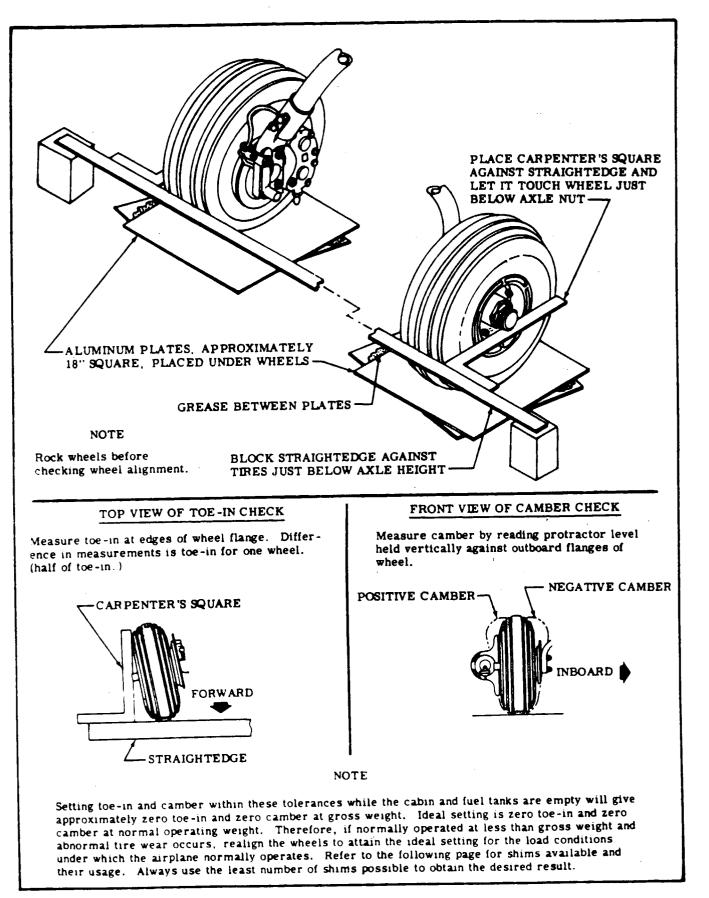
Wheel Alignment (Sheet 1 of 2)
